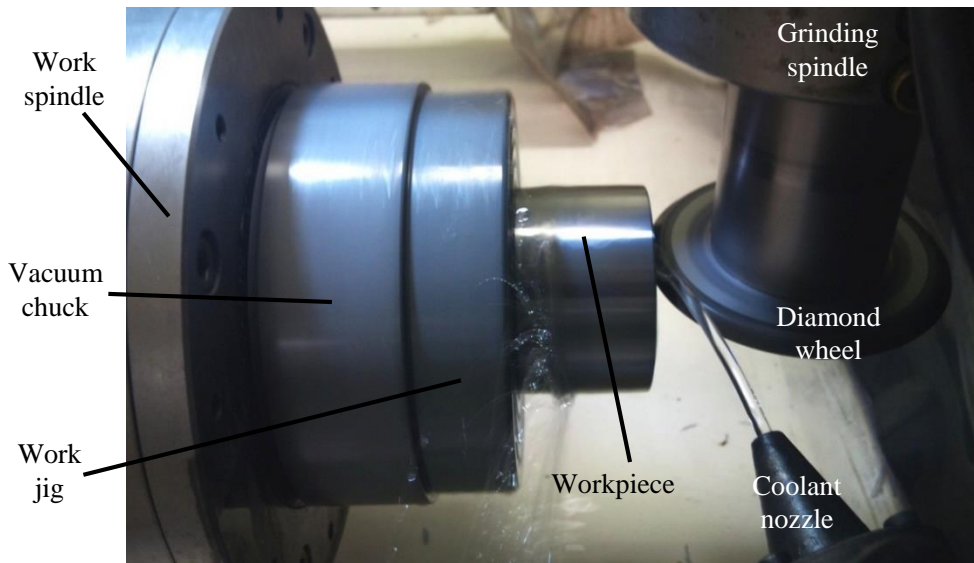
Experimental set-up of Fresnel shape grinding.
